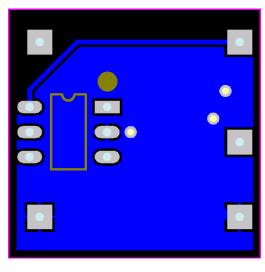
Bottom, TDFN4 1.2 mm x 1.6 mm PCB Layout
